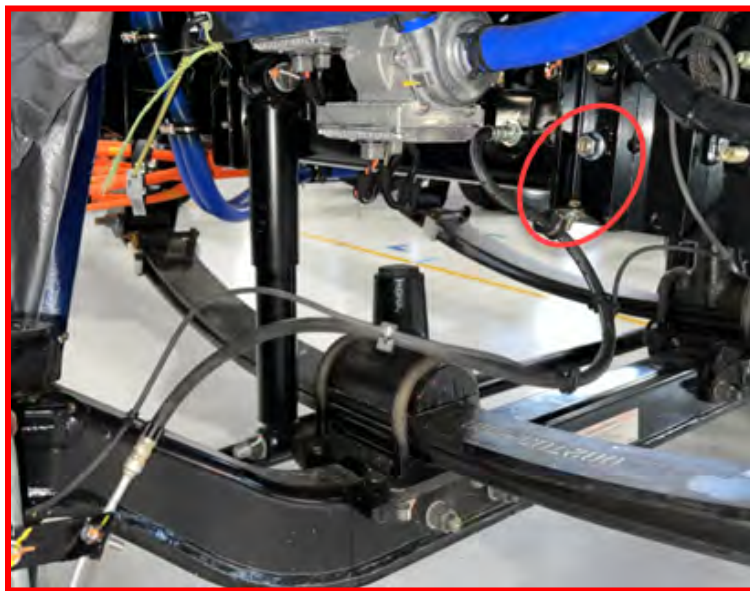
Passenger Side Brake Line Bracket Mounting Location
